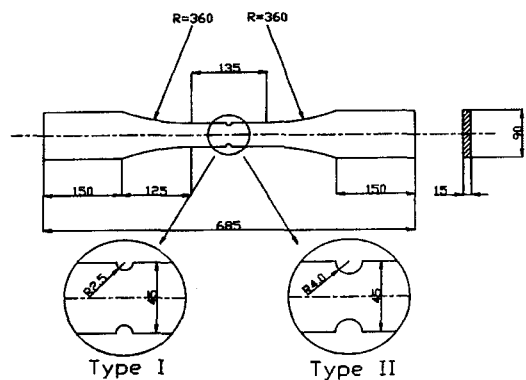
Configuration of Type I, II Specimen with semi-circular edge notch (unit: mm)
